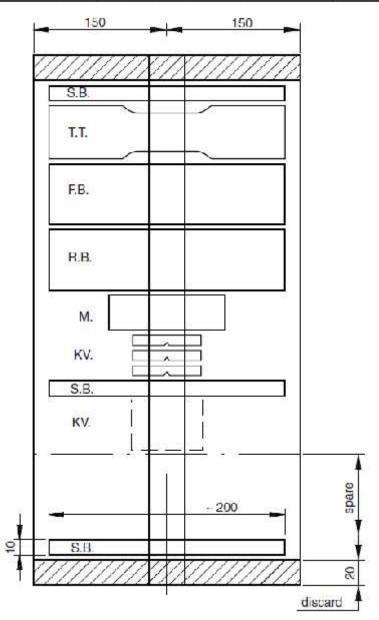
Butt weld test assembly (All the dimensions are in mm.)
